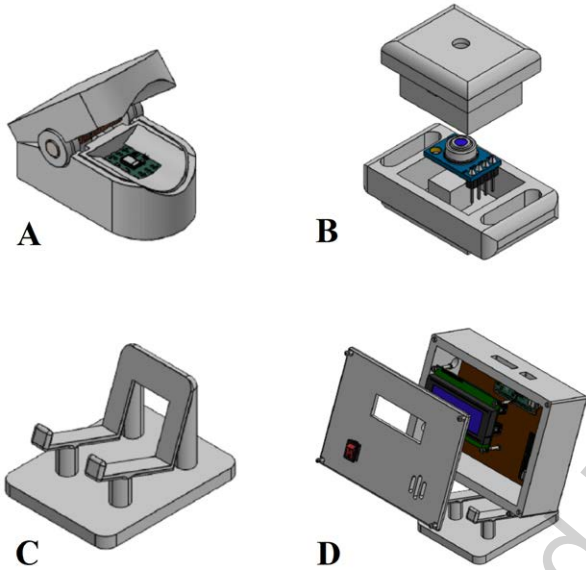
Isometric views of the designed parts. (A) Isometric view of the support for the MAX30102 sensor, (B) Isometric view of the support for the MLX90614 sensor, (C) Isometric view of the support for the container and (D) Isometric view of the system container.
